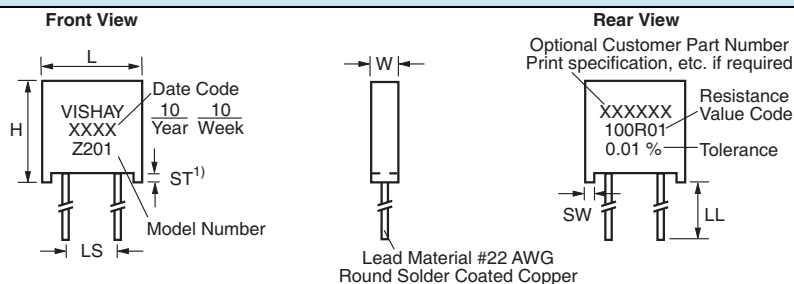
STANDARD IMPRINTING AND DIMENSIONS
